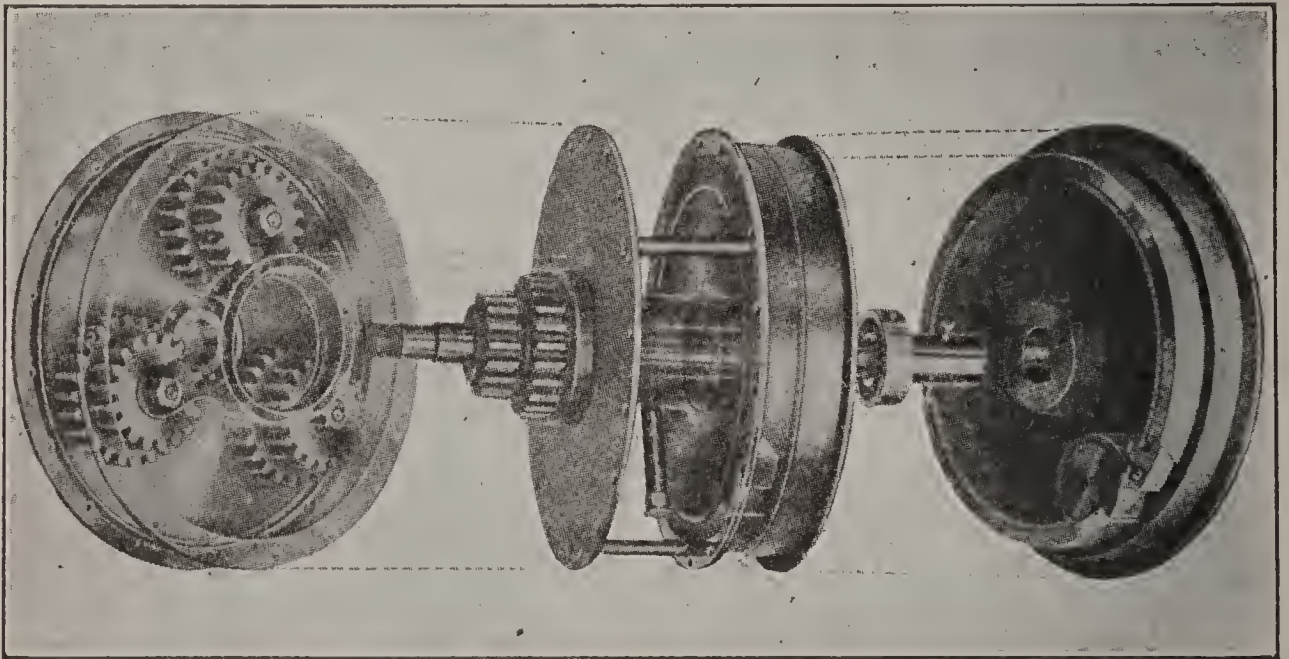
The Thiem Two Speed Hub Partially Disassembled to Show Arrangement of Mechanism.
